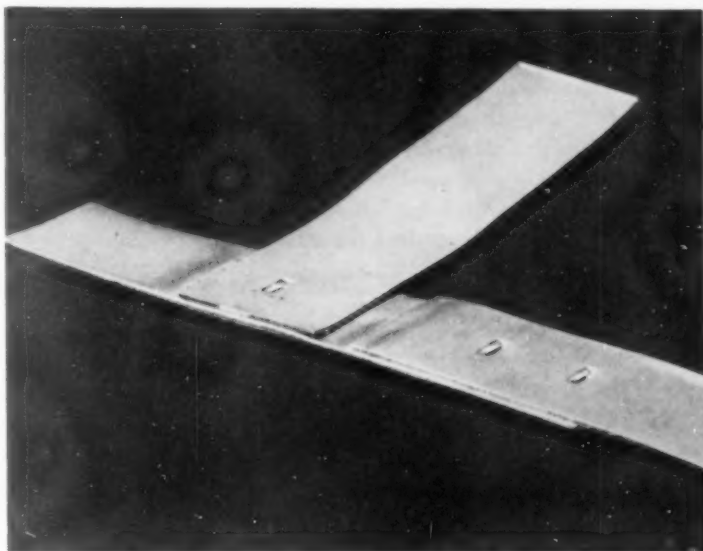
Tools that have joined these pieces of 0.040 inch aluminum sheet can be used to join pieces with unequal thickness as long as the combined thickness is less than 0.080 inch.
